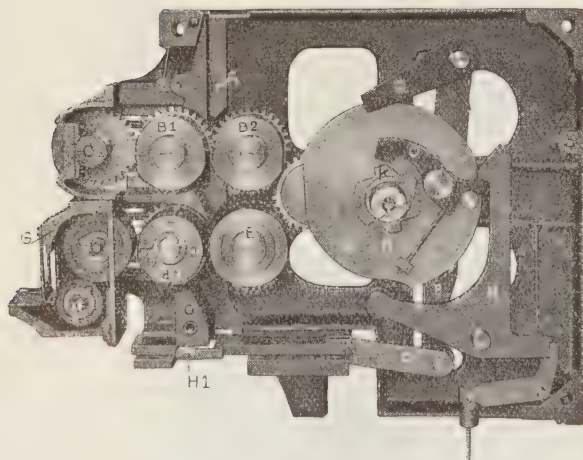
External view of unit containing printing and control mechanisms. A. E. G. « Rapid Printer », booking-office window type.
